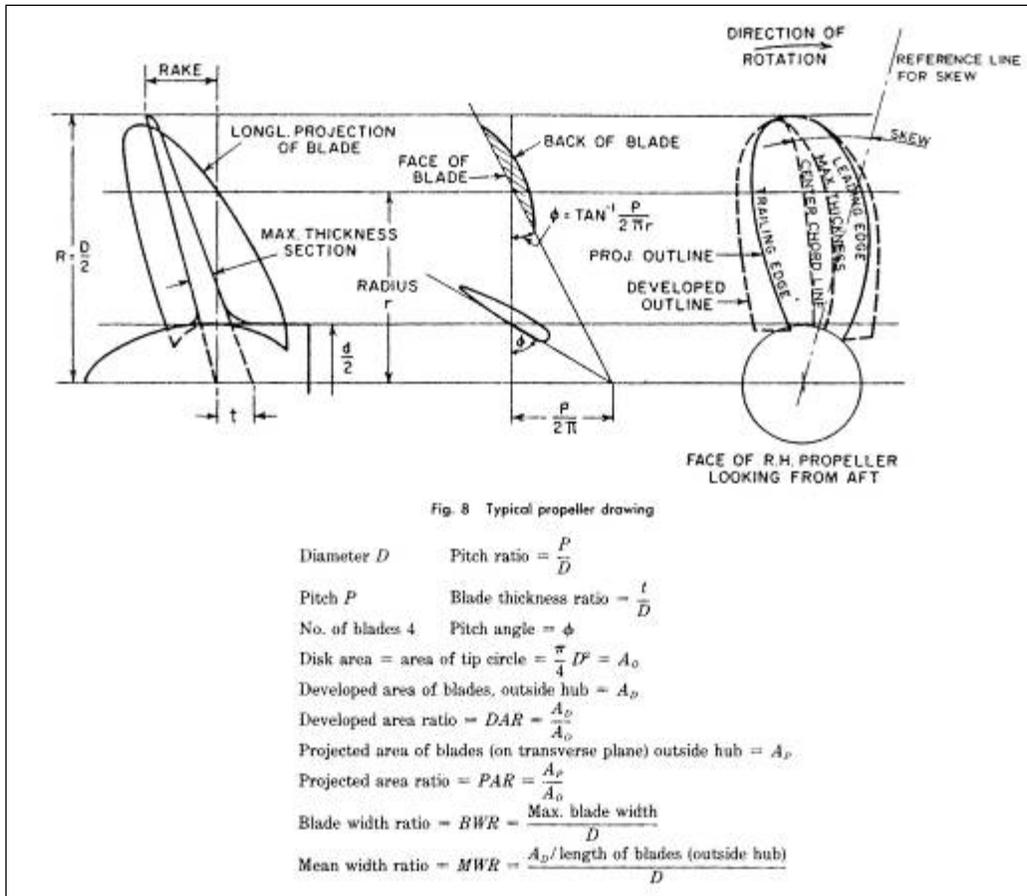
Typical Propeller Blade Drawings and Definitions (From [92])
